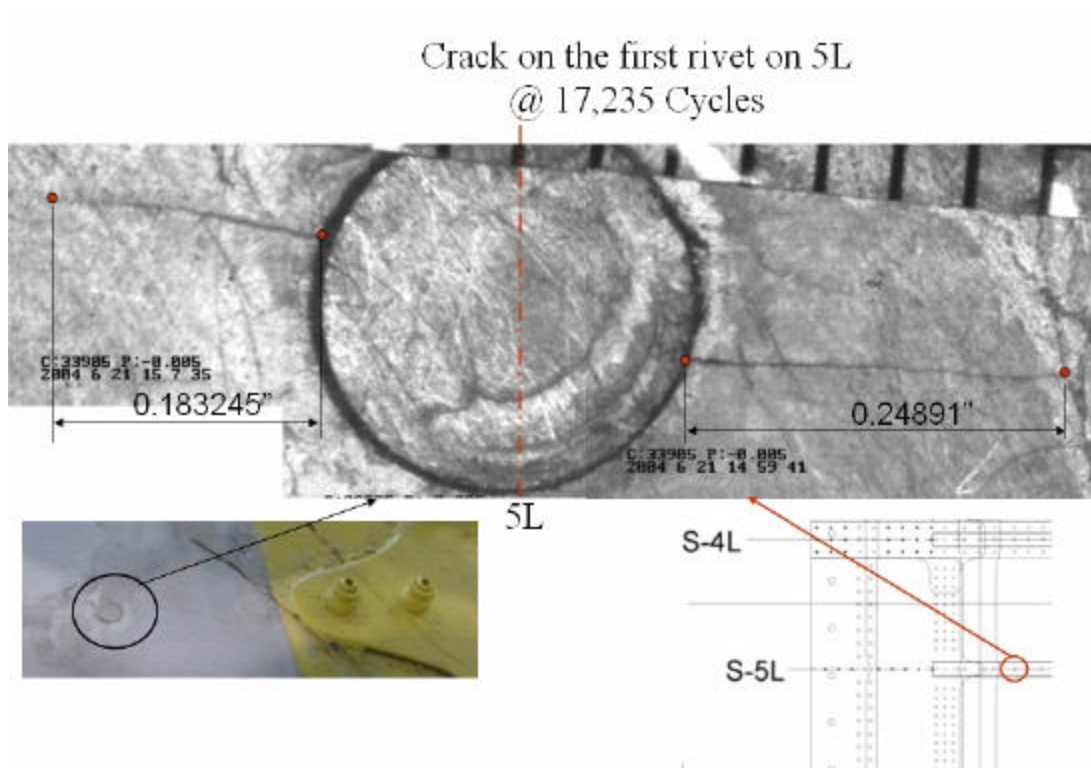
FT2 Crack at Stringer 5L and BS 622.6
